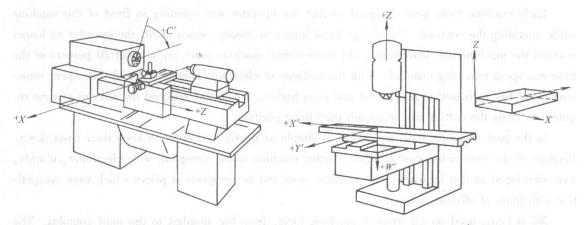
The engine lathe cutting tool moves only on the X and Z axes
